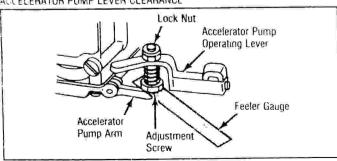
Accelerator Pump Lever Clearance Adjustment
